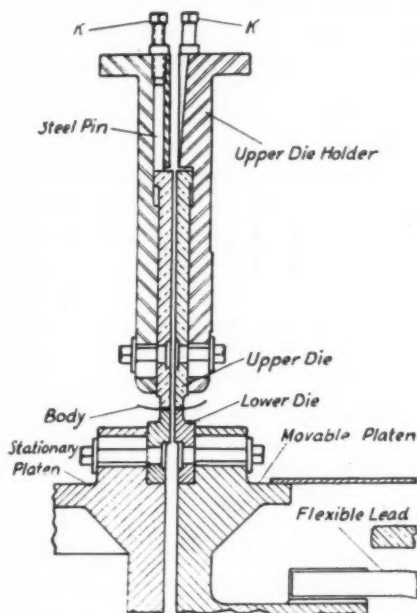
Cross section through the upper portion of the machine showing the position in which the body is clamped between the dies during the welding process
